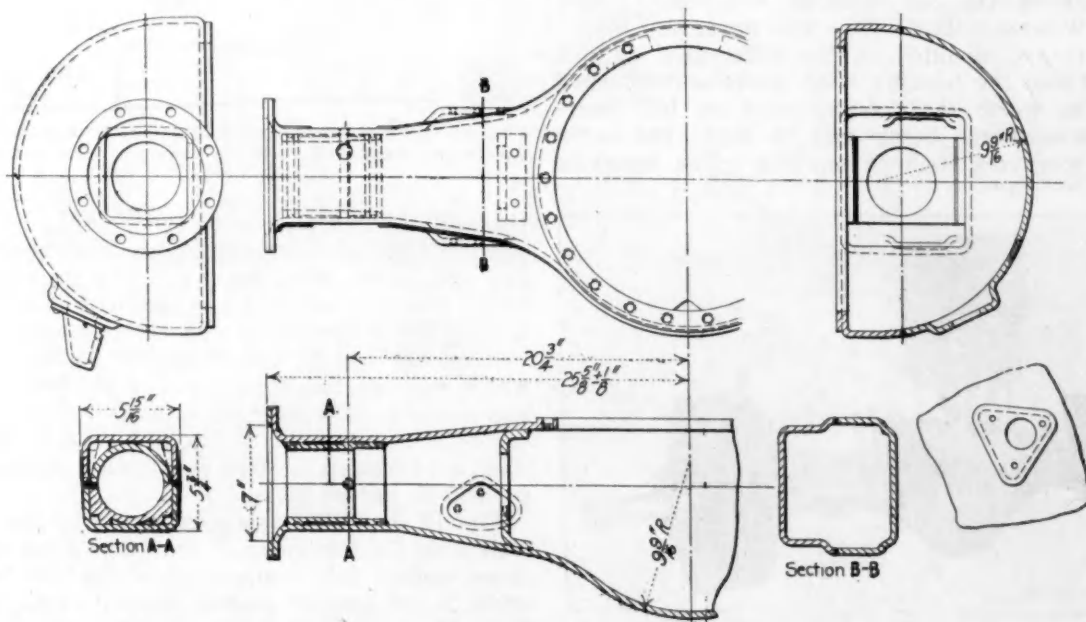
DETAIL OF THE AXLE HOUSING STAMPED FROM STEEL
